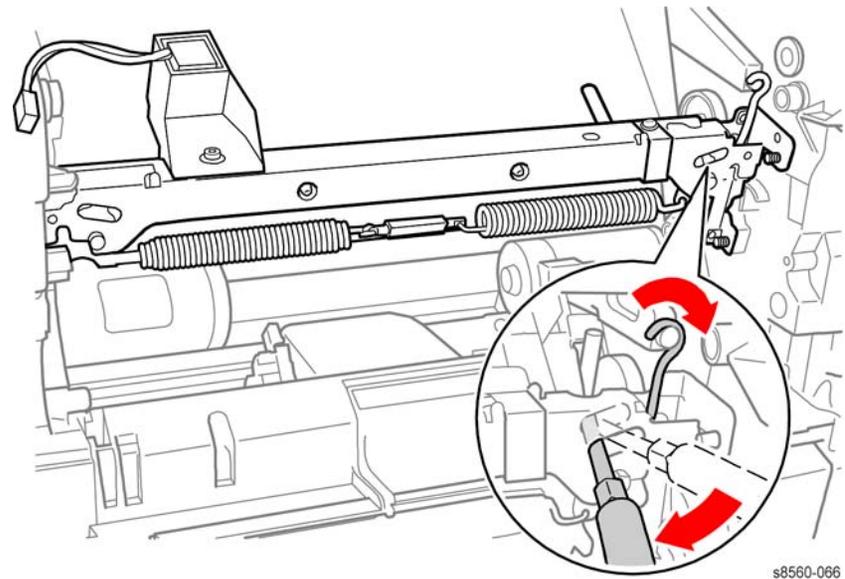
Attaching the Transfix Load Module Arm Cam Springs
